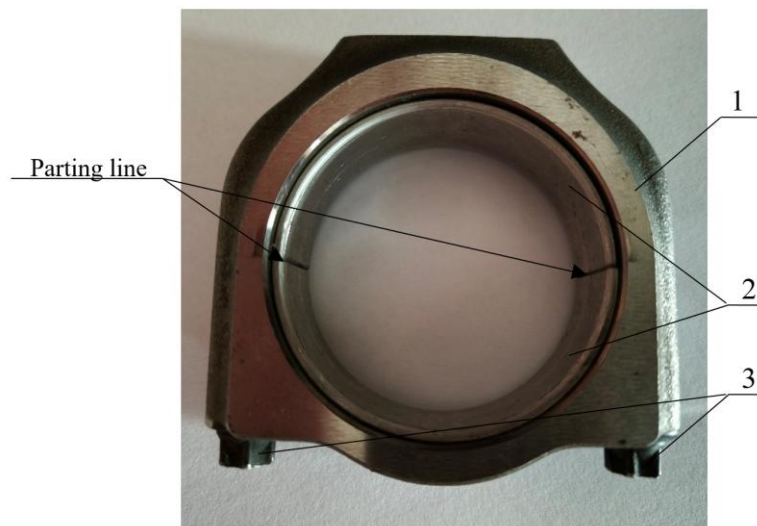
Split holding fixture for the formation of regular micro-reliefs on the working surfaces of connecting rod bearings: 1 – fixture body; 2 – connecting rod bearings; 3 – fastening elements
